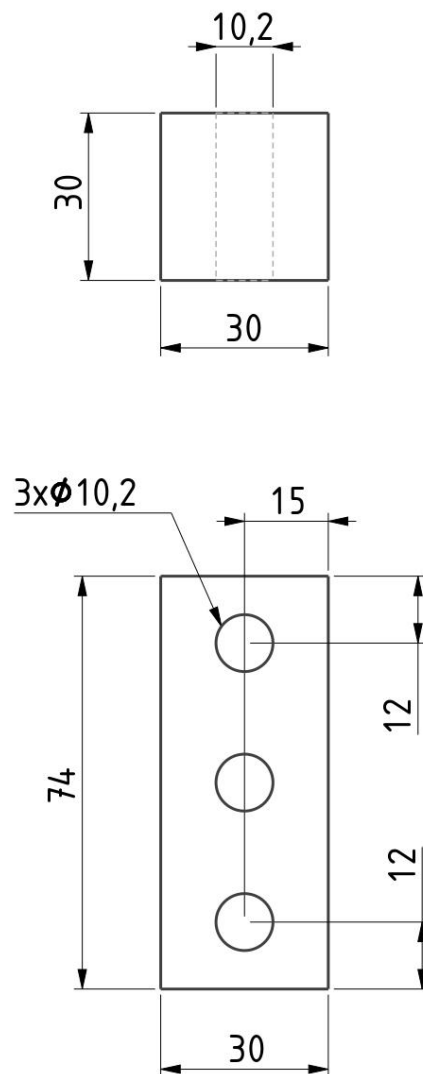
2D technical drawing of the *Base* part of the fix clamp assembly (mm).
